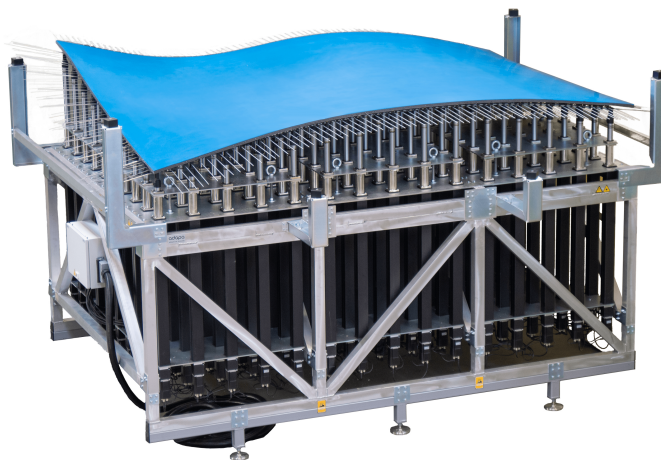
Adaptive piston controlled concrete mould. Photo credit: Adapa A/S.
